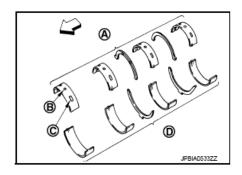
Identifying Main Bearings Courtesy of NISSAN NORTH AMERICA, INC.
